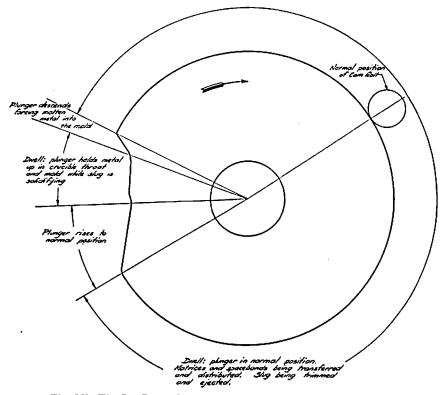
The Pot Pump Cam, showing the surfaces of the cam which promote the main movements of the pot pump mechanism
